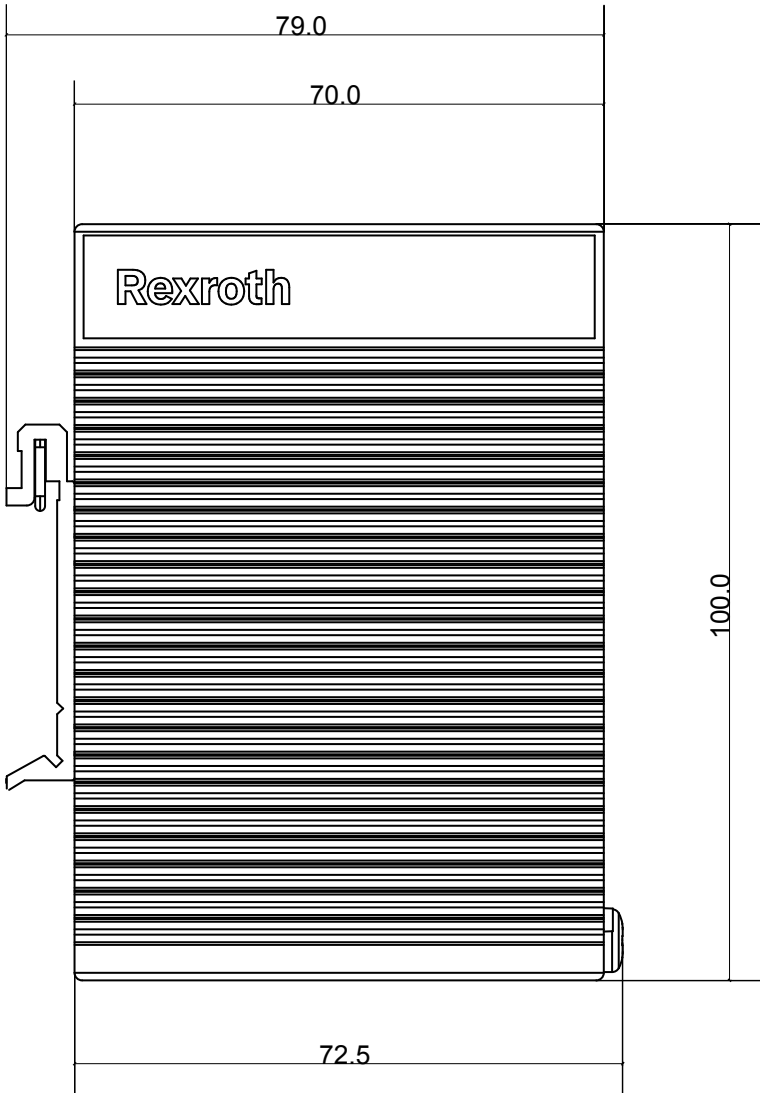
Housing dimensions for device variants NA and NB, top-hat rail mounting, left side view
